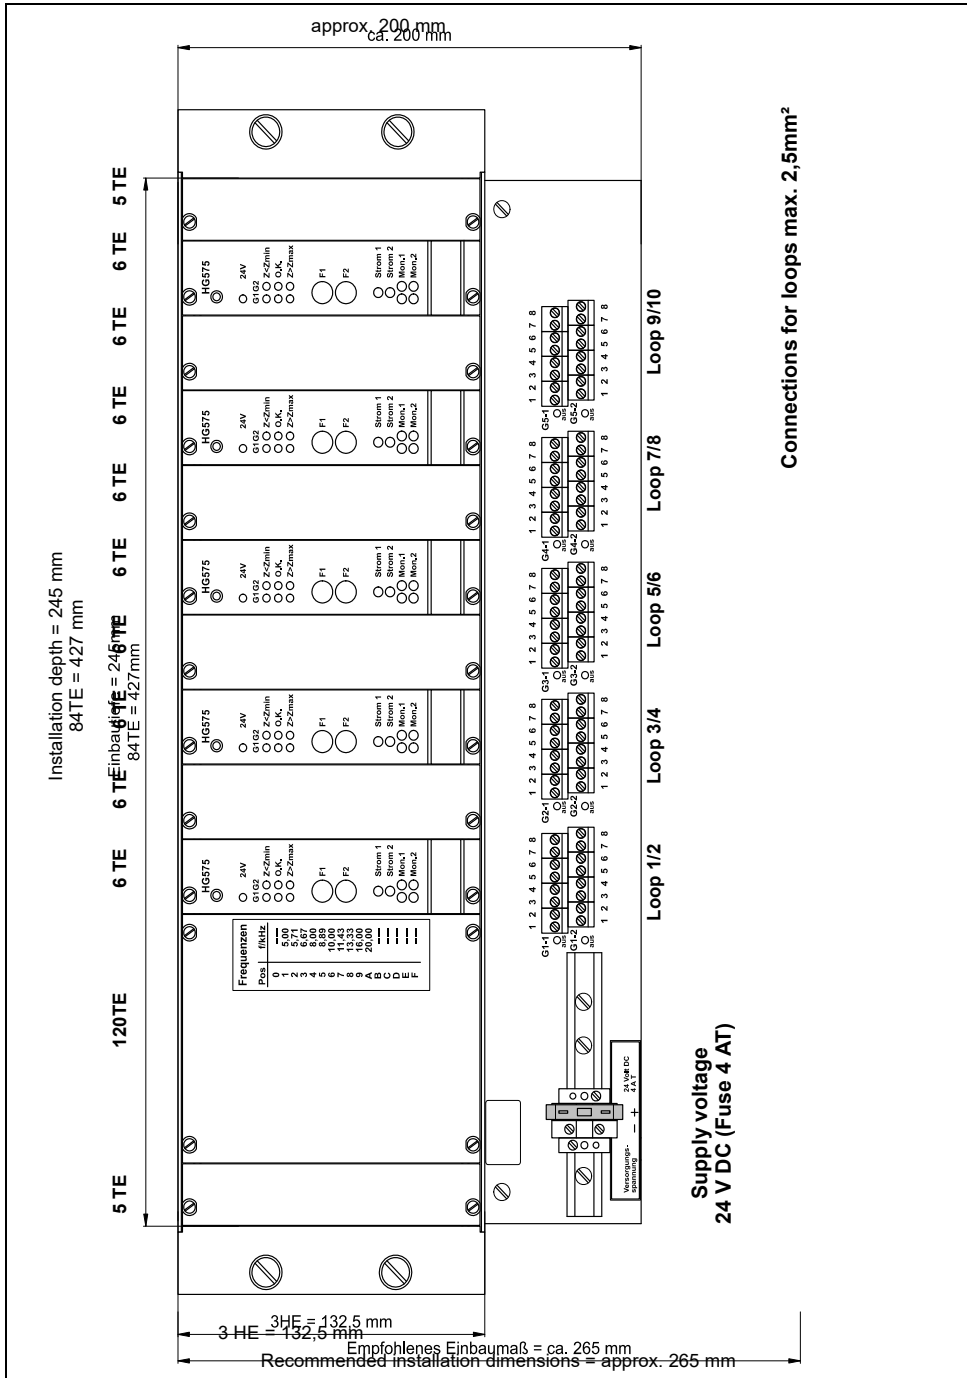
Drawing of rack HG 93161ZA (for 5 HG 57500) with dimensions
